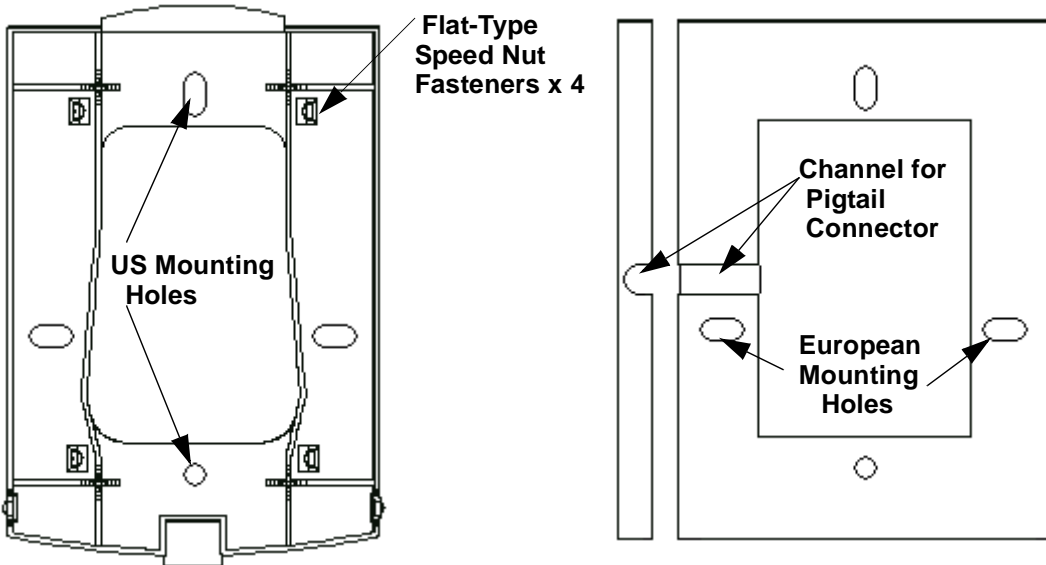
4201 Back-Plate and Spacer With Mounting Holes Indicated
